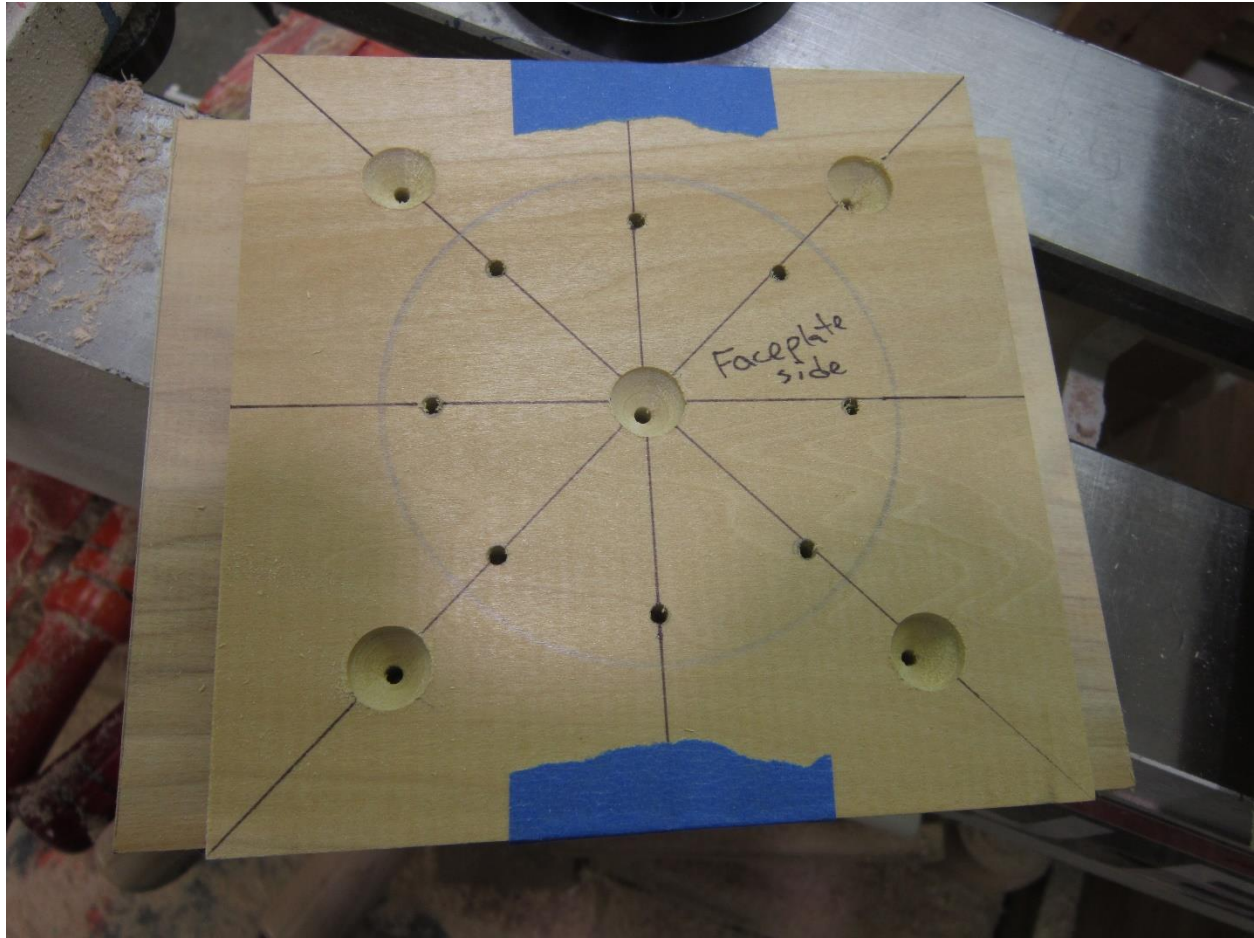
Marking the width of the faceplate board in the center of the back of the workpiece mounting board.
